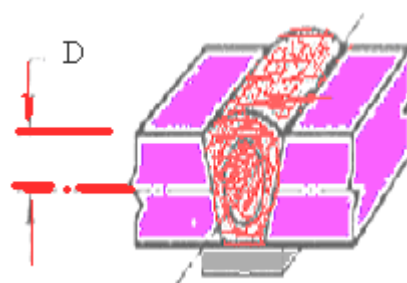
(c) Location of all weld metal tension test specimen.
